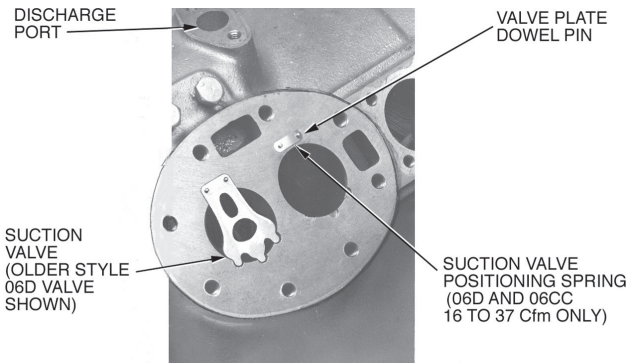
Suction Valve and Positioning Springs in Place (06D Shown)
